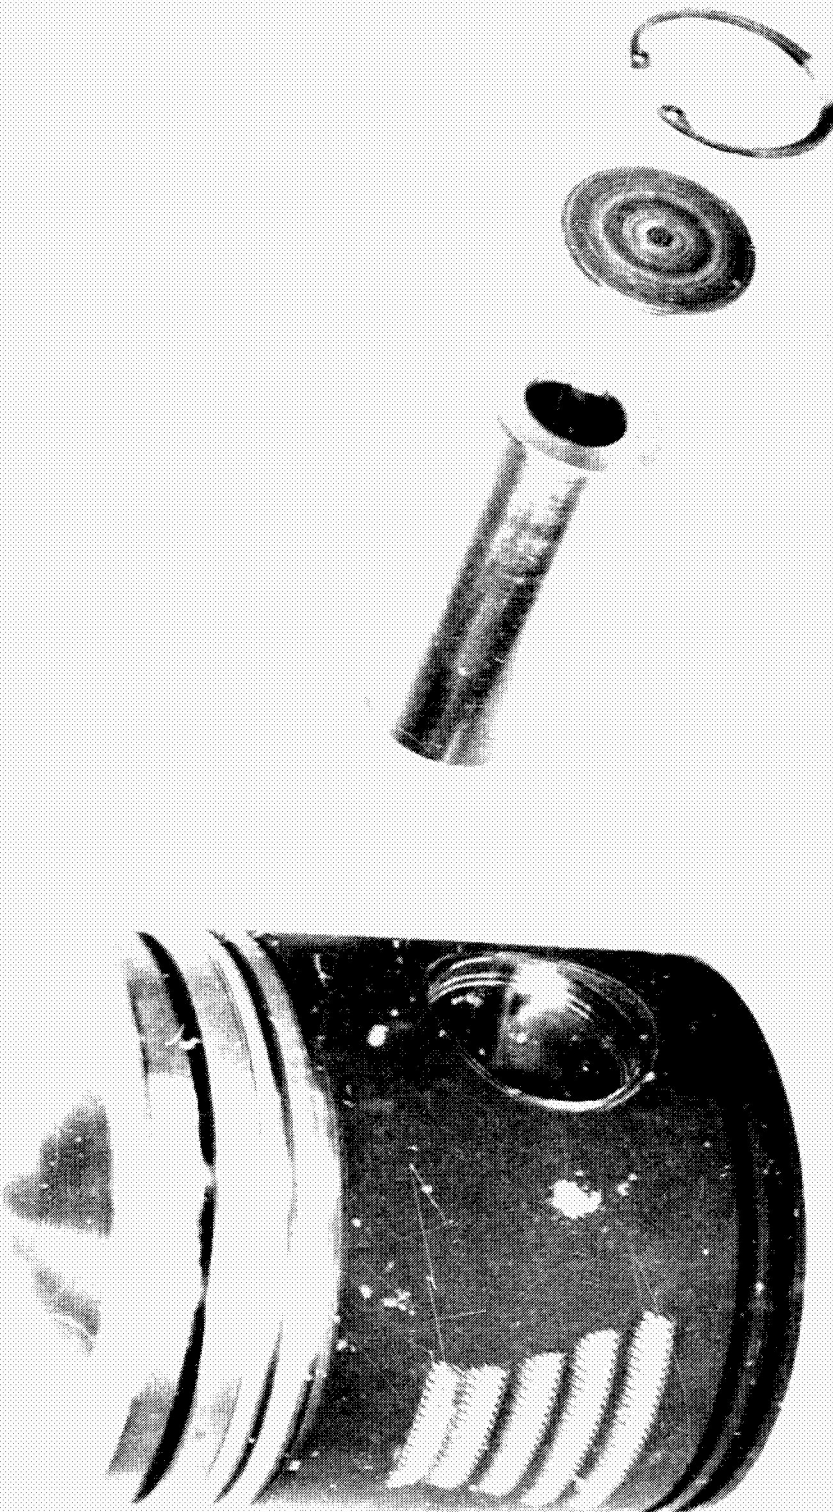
Steel Capped Aluminum Piston Assembly
